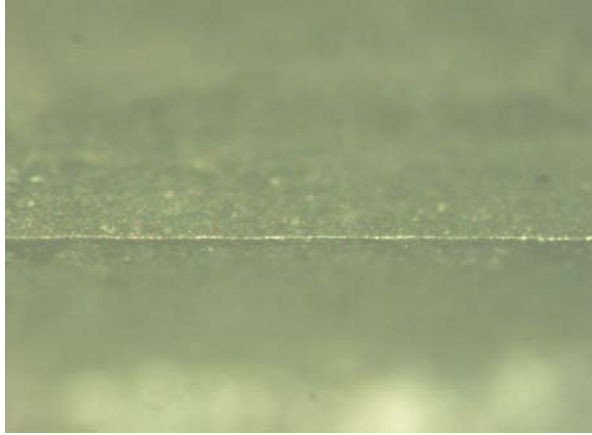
Laser polished cutting edge (cutting edge viewed at 45°, mag x5)
